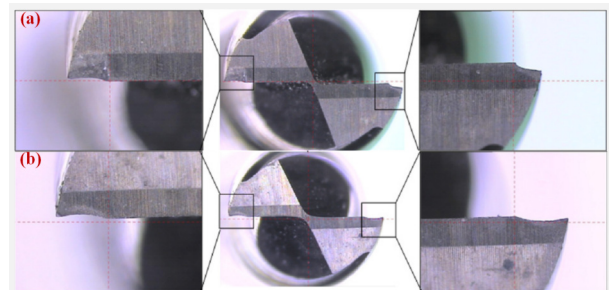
Tool wear ¹⁰⁴ (a) CMM (b) UVAMM.
